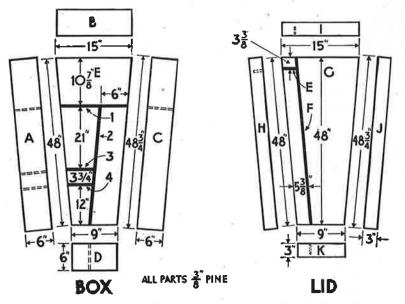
PLAN FOR CARRYING CASE—TRIANGULAR TYPE
